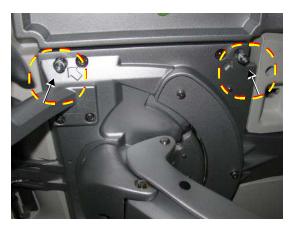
Loosening the Captive Hex Screws beneath Keyboard Assembly - Left Side
